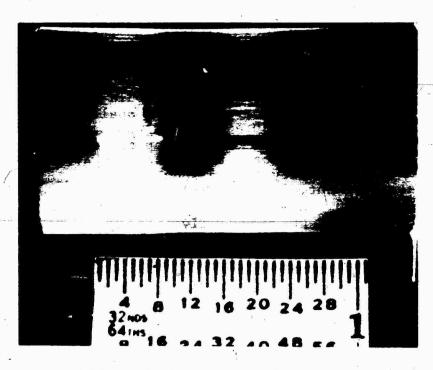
Section From Bearing Outer Ring Showing Surface Initiated Failure (P/N 114DS143-1).
